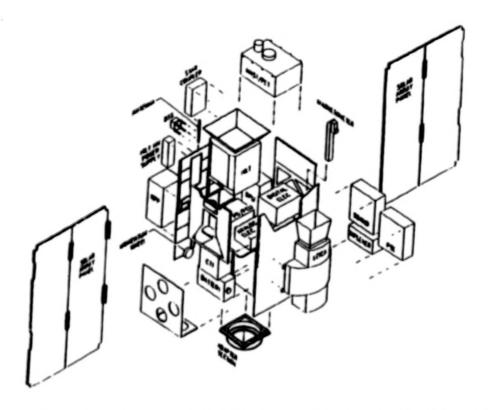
AN EXPLODED VIEW OF THE SAMPEX INSTRUMENT AND SPACECRAFT
